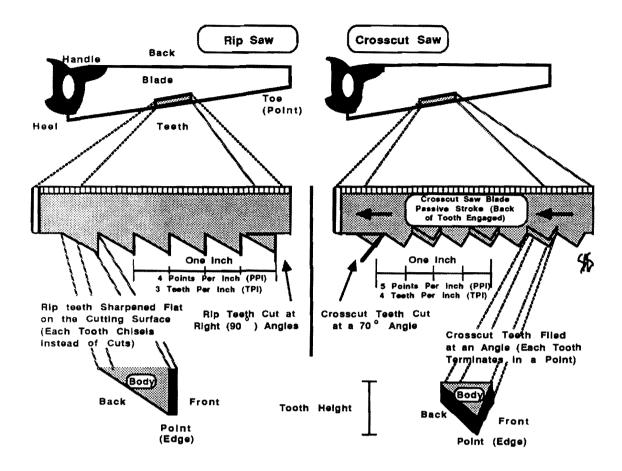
Illustration of common carpenter saws, rip and crosscut. Each is displayed with blades and teeth enlarged to demonstrate the number of teeth per inch, tooth shape, sharpening angles and features of a tooth.
